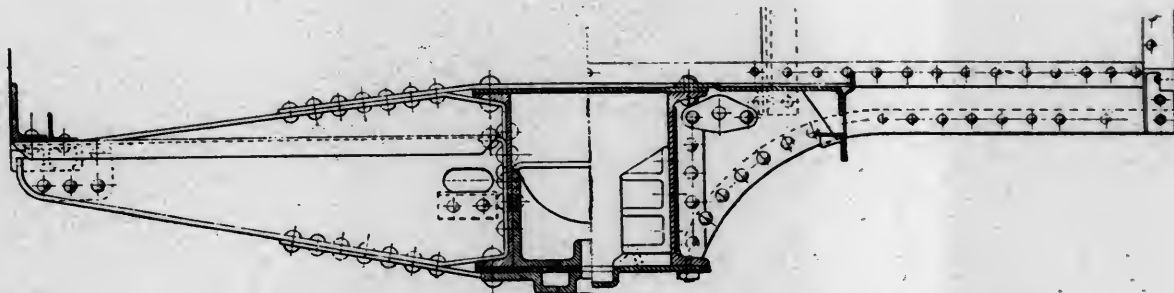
SECTION THROUGH FORM II. UNDERFRAME AT CANTILEVER AND AT PLATFORM.
